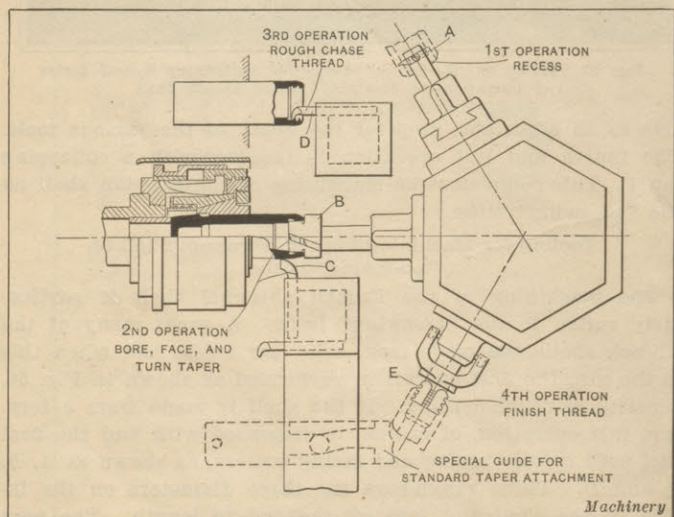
Third and Final Chucking on French Shrapnel Shell
